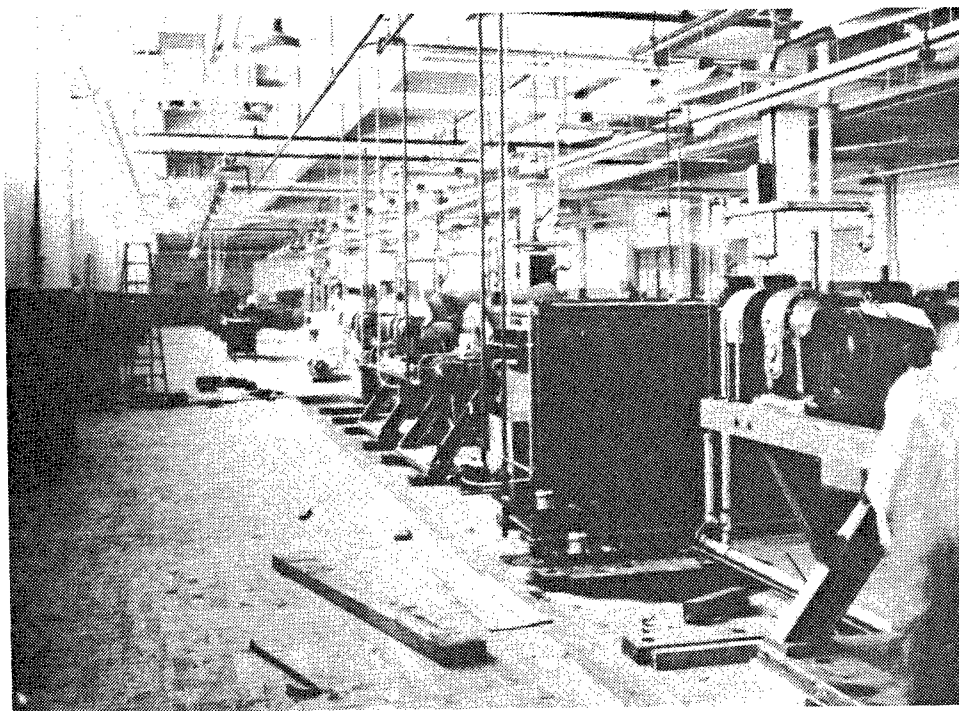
Overview of LCOP Primer Manufacturing area interior during construction, ca. 1941 (original photograph on file, LCAAP).
